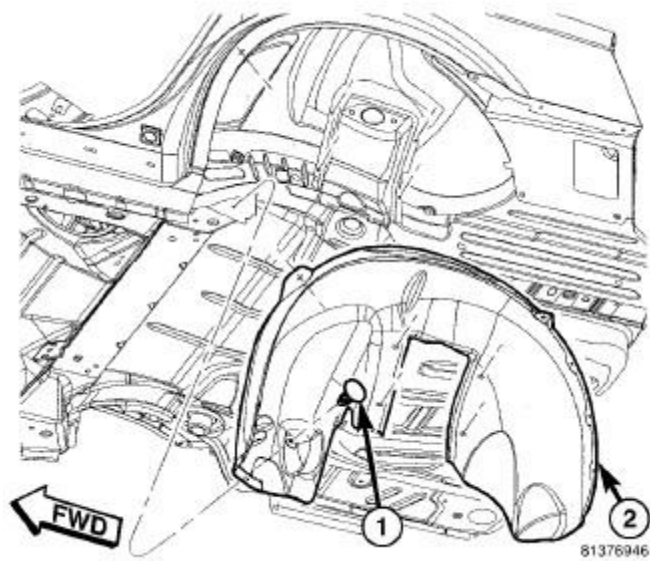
Removing/Installing Rear Wheelhouse Shield
